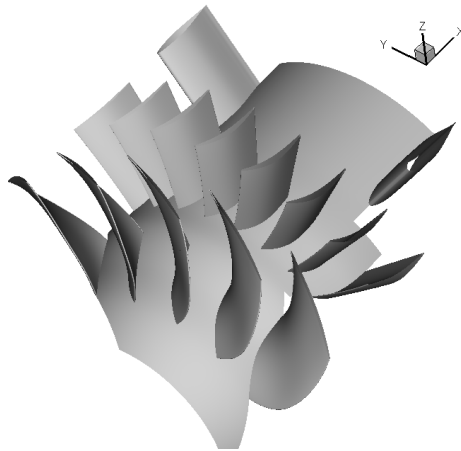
Cutaway view at the transonic compressor rig, front looking aft, rotor, stator and struts.
